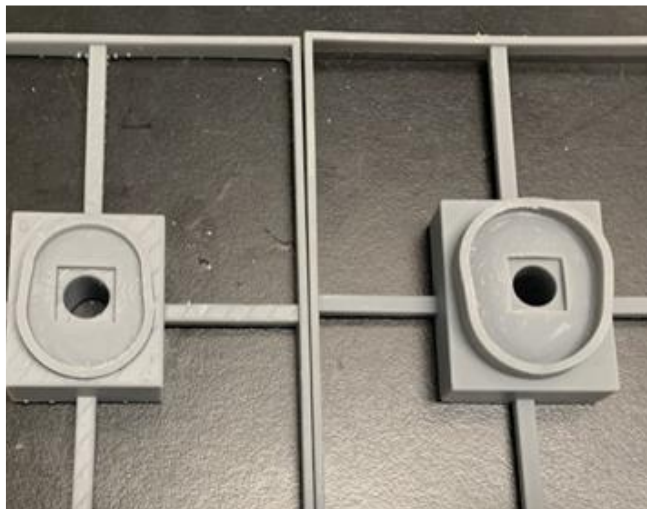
Vacuum-based holding System attachment Components for the Small (left) and Medium (right) Specimens.
